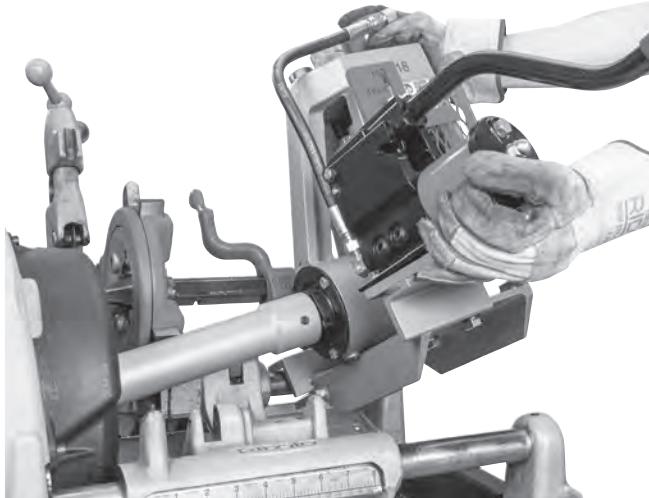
918 Roll Groover on 535 Threading Machine Mounting Base
